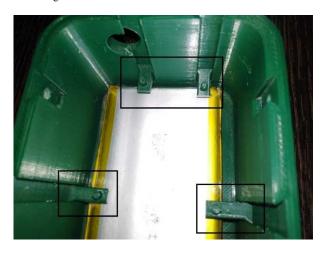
Mobile wedges inside the prototype for the adjustment of the development plates.
